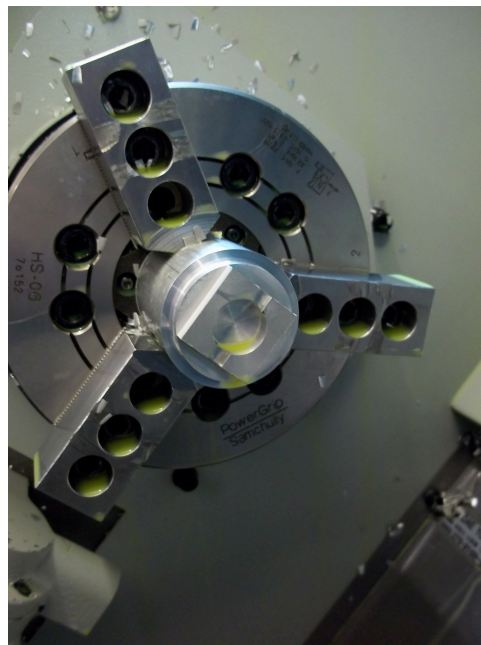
Experimental part in the turn-mill machining centre for part 1
